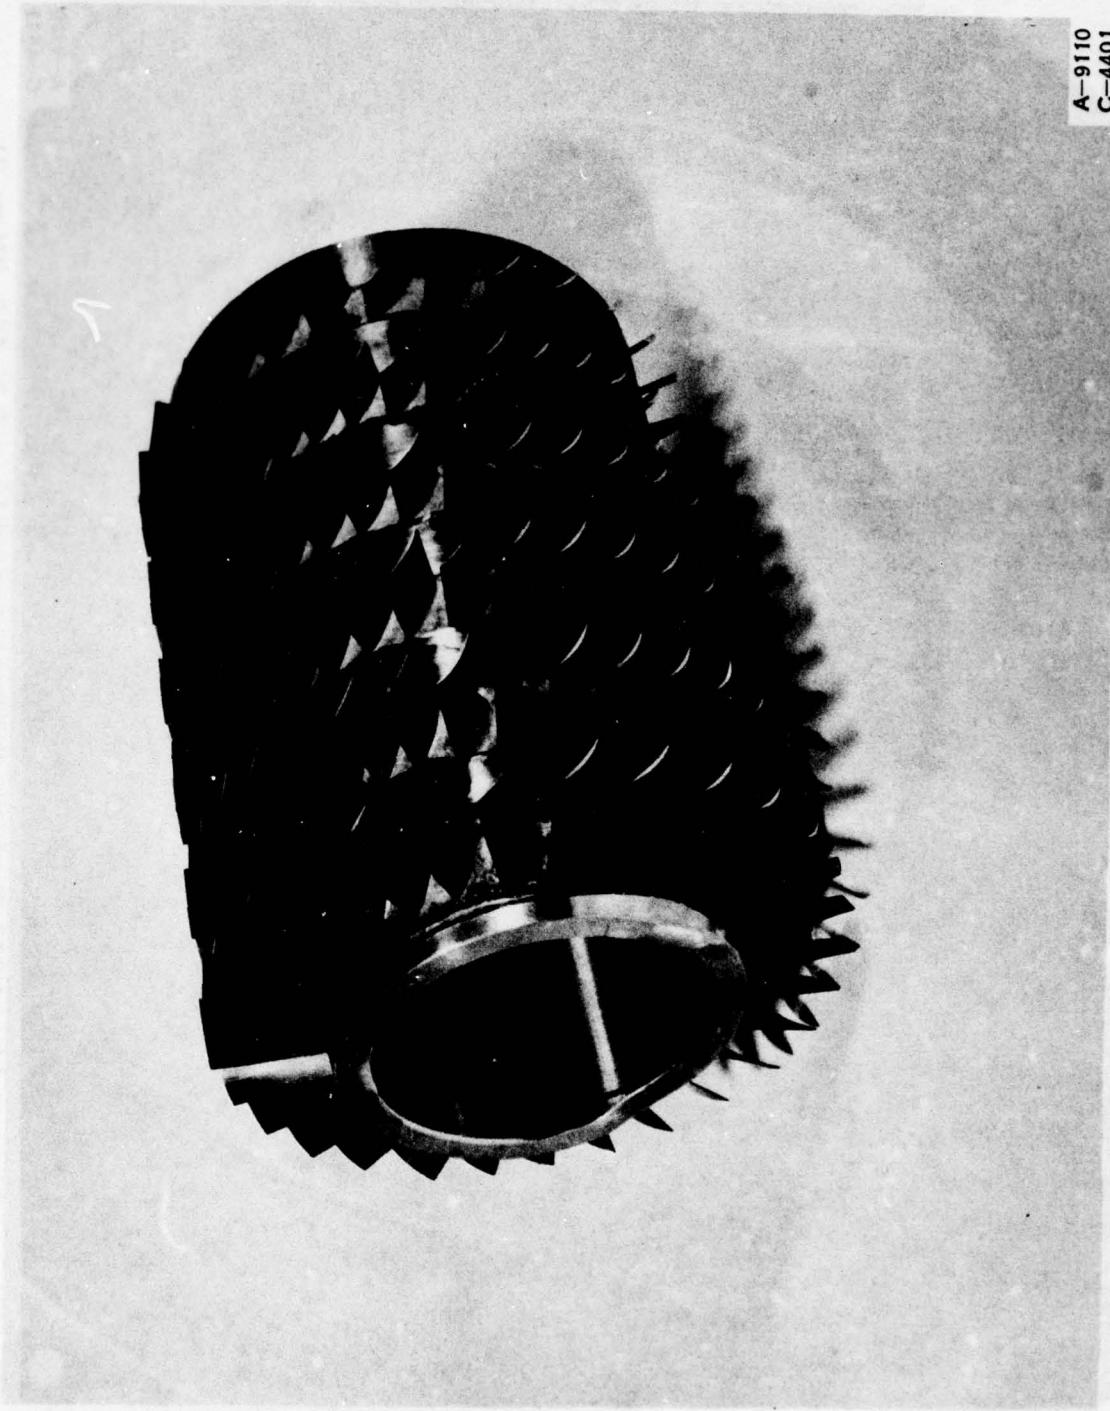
WR33 Turbine Exhaust Assembly - P/N 400 (View 2)
